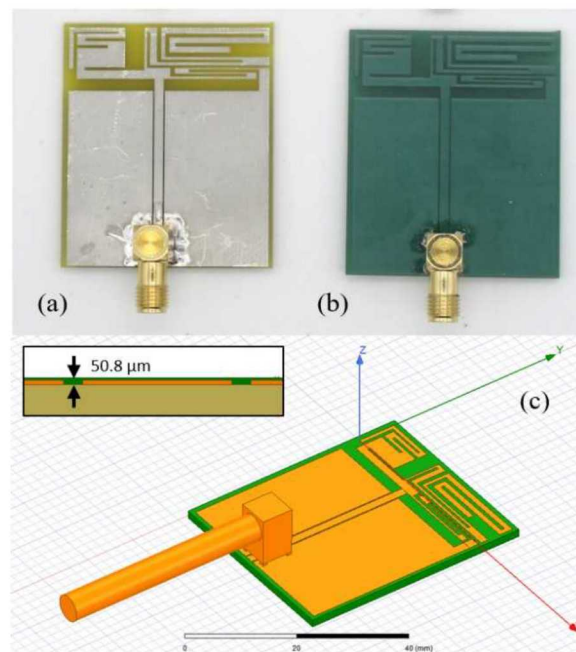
As-fabricated PCBs (a) without solder mask, (b) with solder mask (c) computer model (inset shows cross section of CPW transmission line with modeled 50.8 μm thick solder mask).
